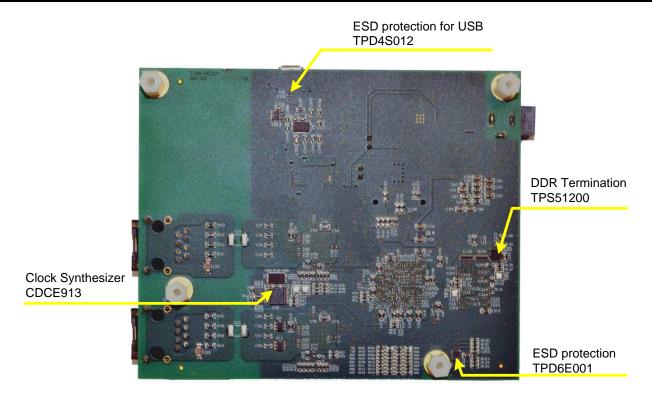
TIDA-00204 Bottom-Side PCB Photo With Key Functional Blocks
